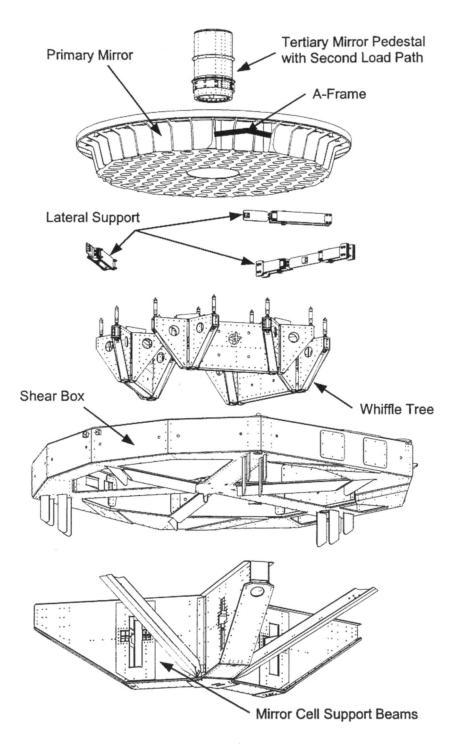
Exploded view of the SOFIA primary mirror mount. (From Bittner et al. 40)
